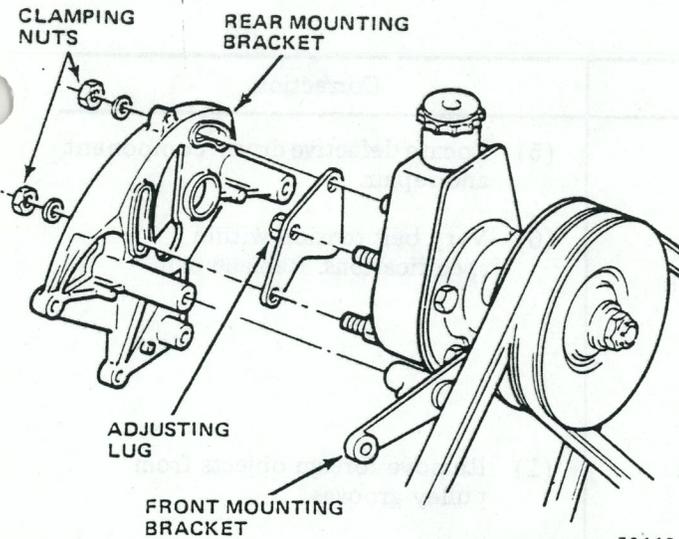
C-23 Eight-Cylinder Engine Power Steering Pump Drive Belt Adjustment
